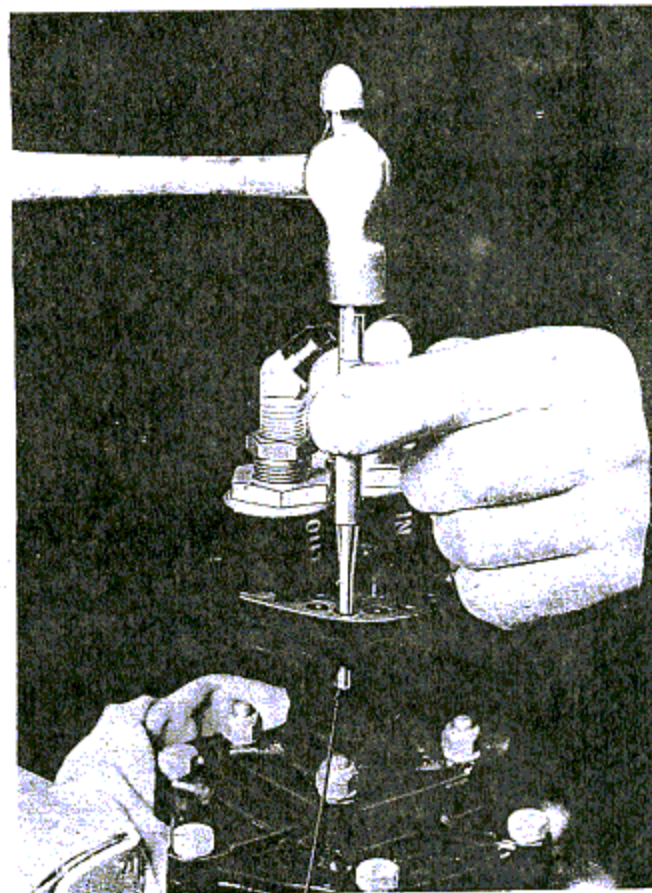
Removing Bolts to Separate Hydraulic Pump Unit
